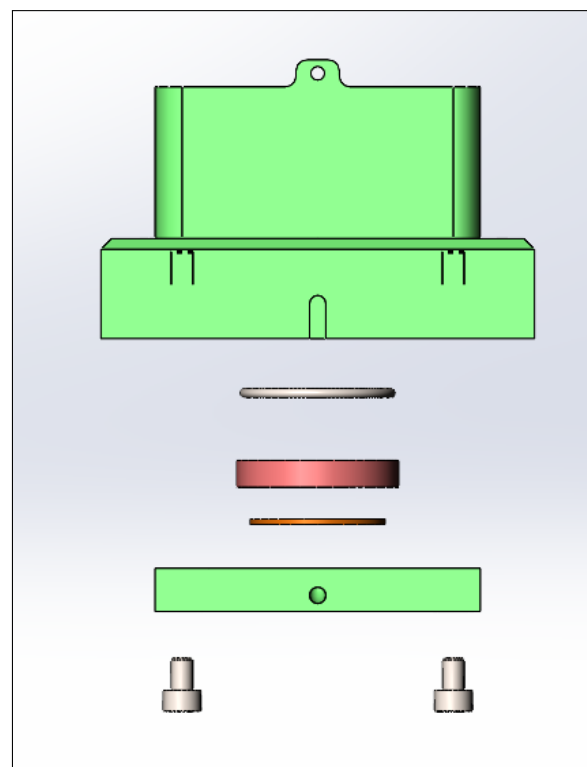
depicts the axle base and its intended mounting on top of the motorized positioning stage, which is further installed on the motor stage and optical board. The axle base is designed with a simple geometric shape, taking into consideration the ease of machining using a milling machine, followed by drilling the holes to ensure proper fitting. The emphasis on simplicity in its design allows for efficient fabrication and assembly of the axle base.
